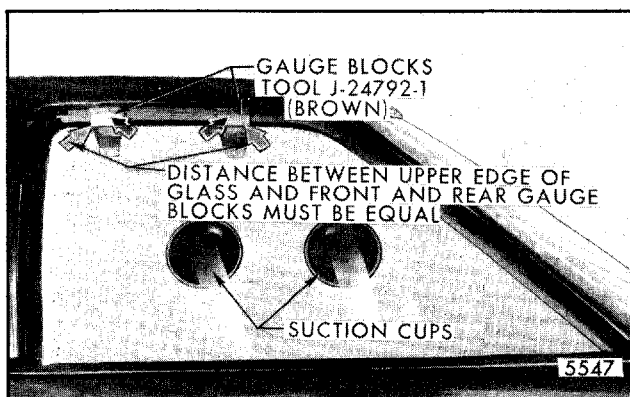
Front Door Window - Rotated Glass Alignment - "A" Styles
